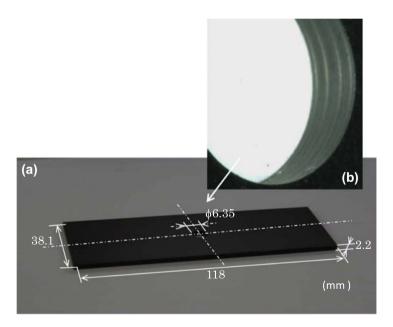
Specimen for OHC test: (a) the dimensions of the specimen and (b) the hole surface.
